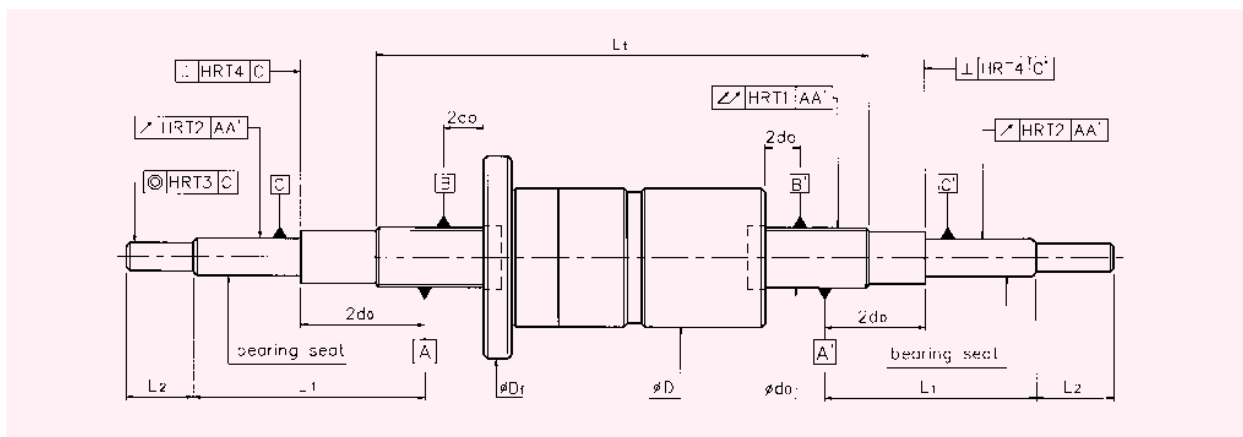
Geometric tolerance of HIWIN high precision rolled ballscrew
